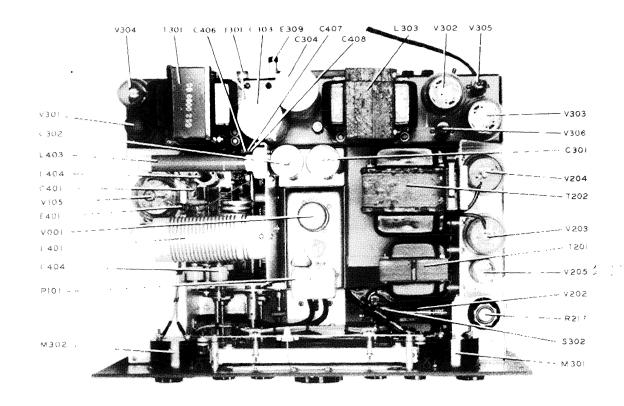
2 32V 2 PARTS ARRANGEMENT - TOP VIEW
